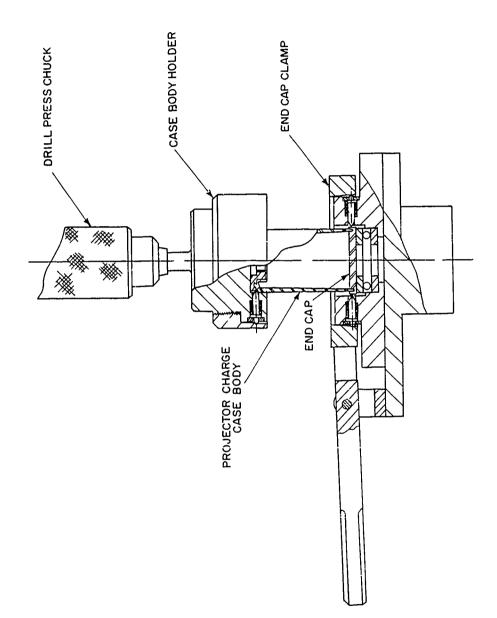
SPIN WELDING FIXTURE FOR PLASTICS PROJECTOR CHARGE CASE
